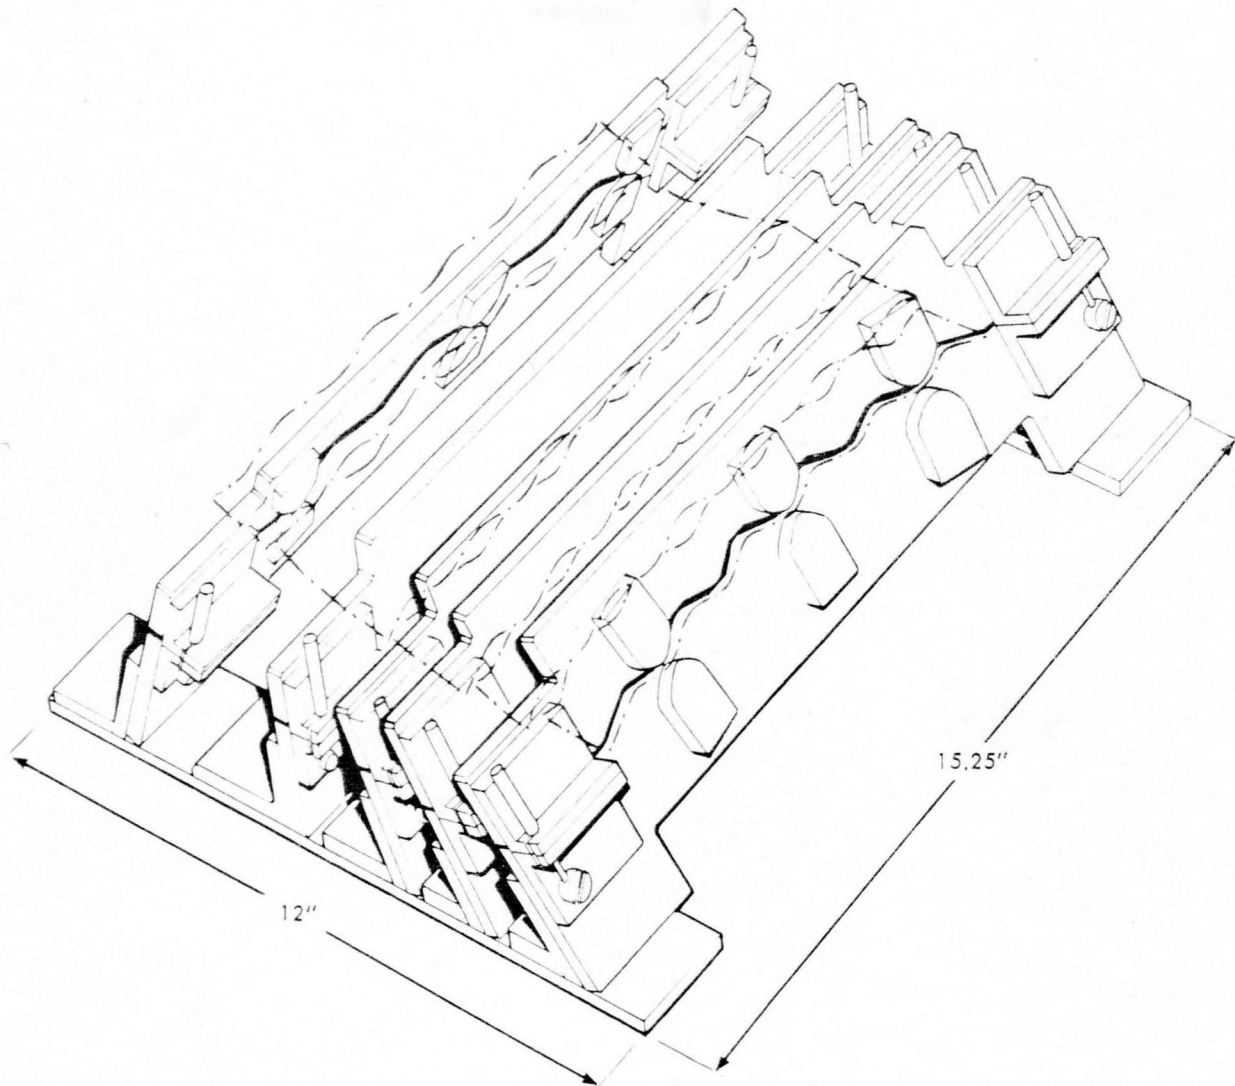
ASSEMBLY JIG FOR EXHAUST BOX CORRUGATIONS
